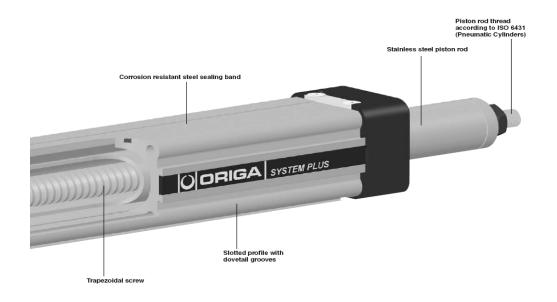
Screw drive and piston rod mechanism for the upper part
